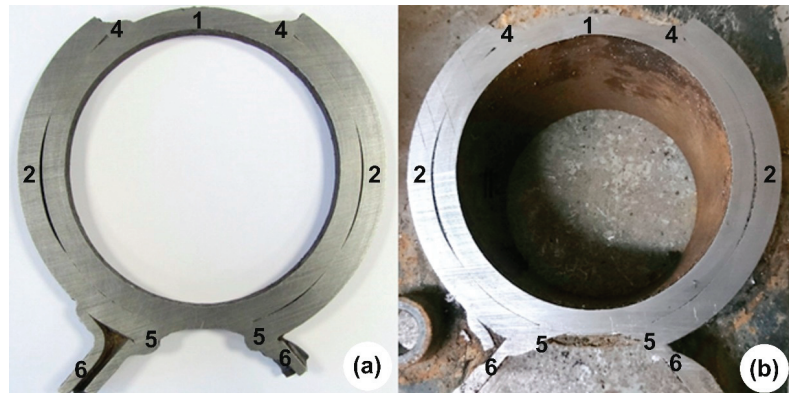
Two sides of the same cross-section at welds of the axis unit: (a)—broken side; (b)—unbroken side. The numerals mean: 1—axis; 2—bushing; 4, 5—angle welds; 6—arm.
